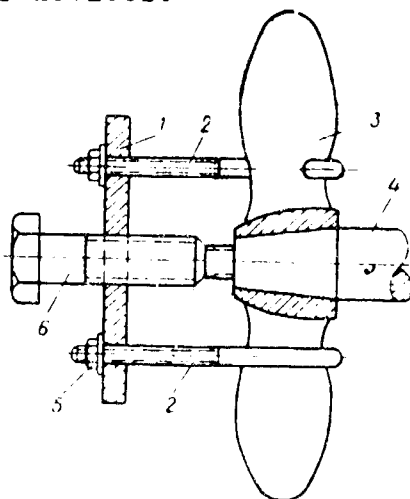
Removal of Propeller Screw with Hooks: 1 - pressure strip; 2 - hooks; 3 - propeller screw; 4 - propeller shaft; 5 - nut; and 6 - mounting bolt.
